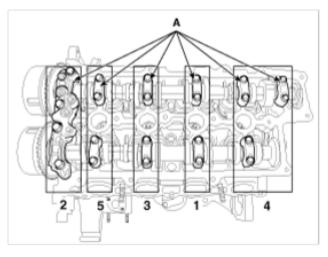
Identifying Camshaft Bearing Caps Installation Sequence Courtesy of HYUNDAI MOTOR AMERICA
